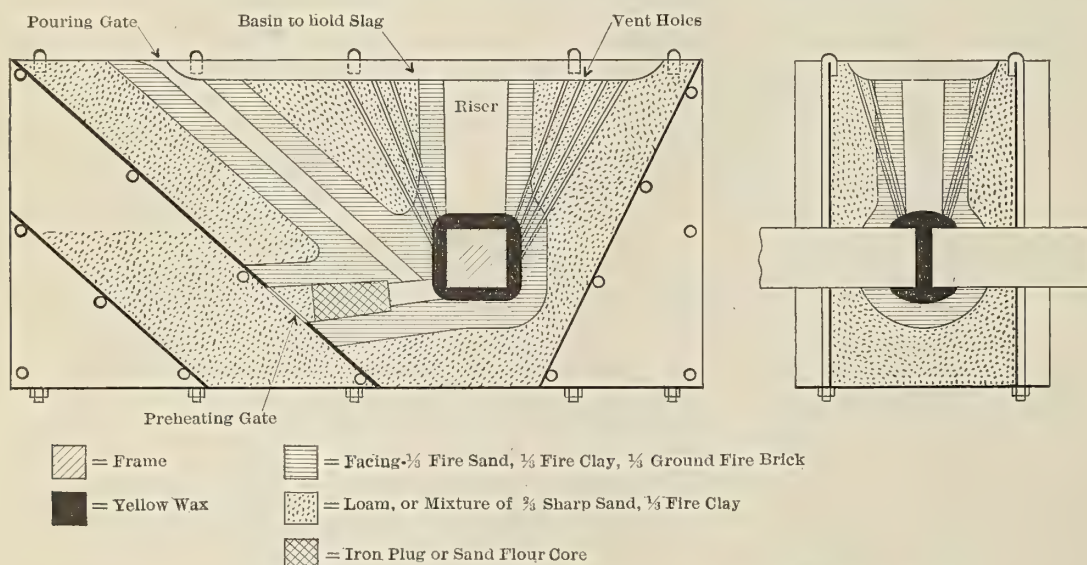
Construction of Molds and Materials Required for Making Thermit Welds
